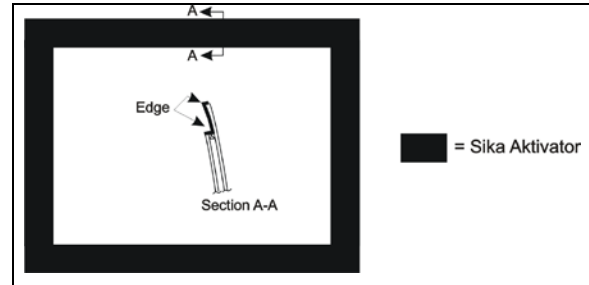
FACE FIXED WINDOWS - RUBBER SEAL INSTALLATION
